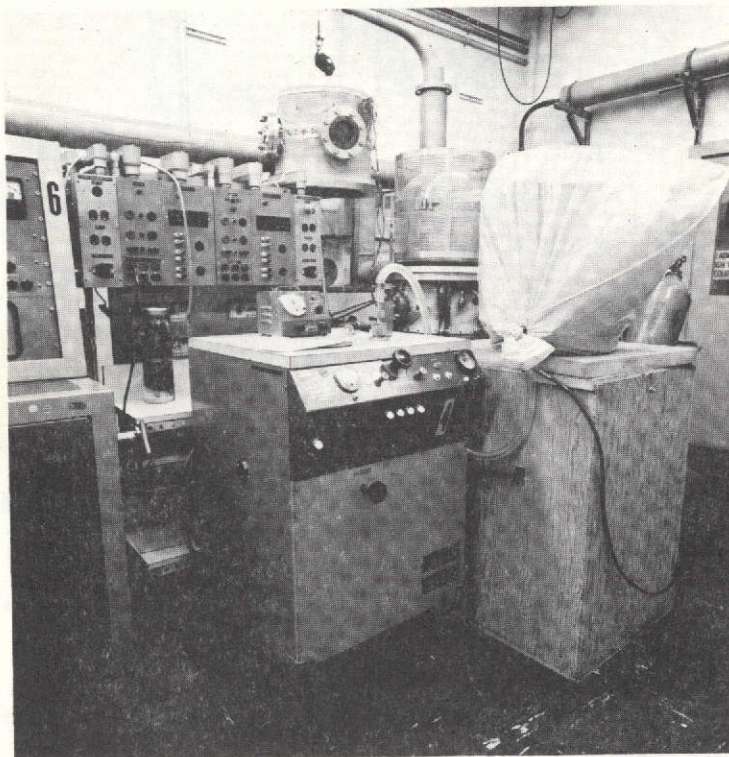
Assembly, Bagged for Helium Leak Check
